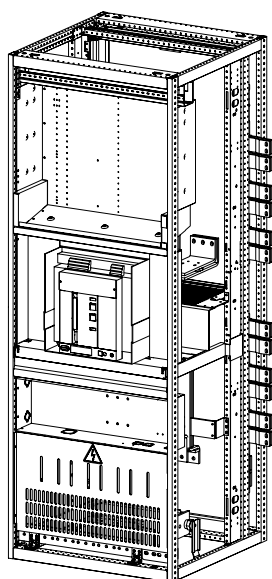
Top auxiliary recess in standard and mounting position and bottom auxiliary recess in standard position
